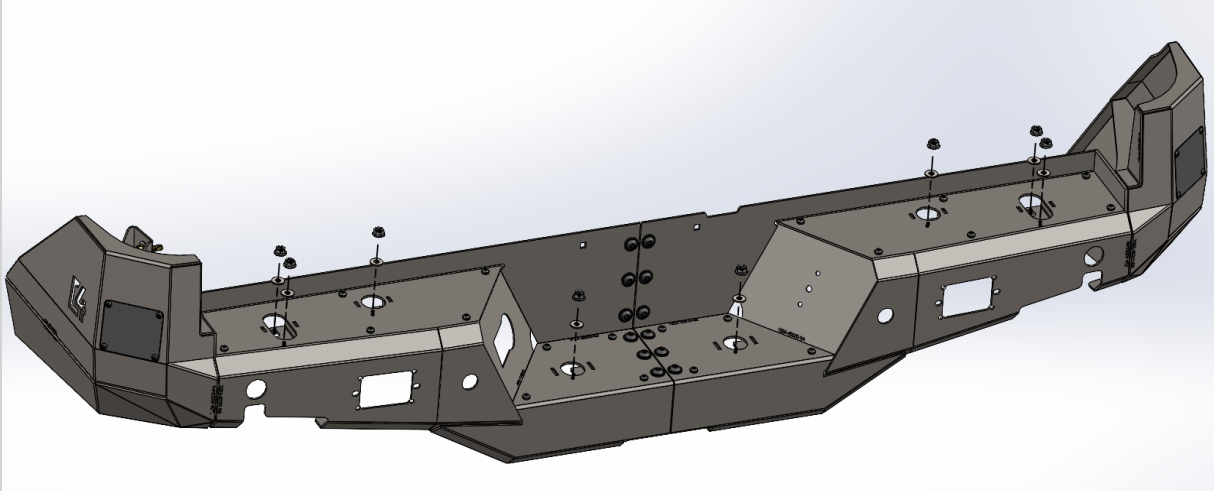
Use the factory nuts and 1/4" washers to secure the bumper to the frame.
